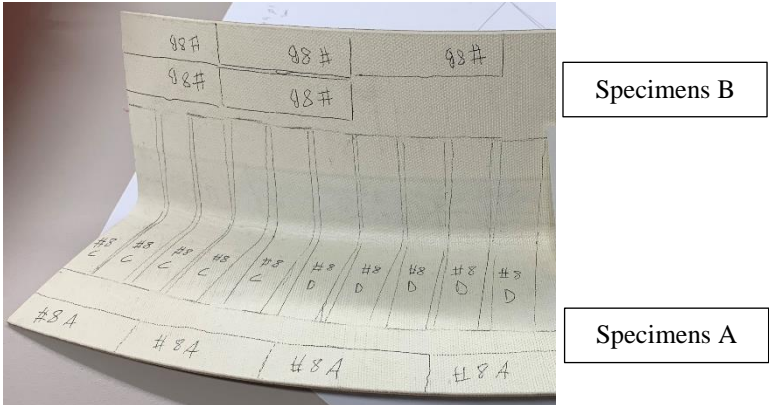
Wet-formed angle ring with marking of sections for mechanical testing (Photo DuPont)
